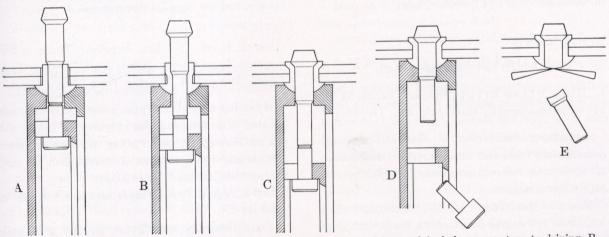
A—Self-Plugging Cherry Blind Rivet is placed in gun and inserted in hole preparatory to driving. B—Pull from gun is drawing enlarged portion of stem into shank of rivet, expanding it to fill the hole. C—Continued Pull has expanded all of rivet shank, conical tip of stem has upset rivet tail to form head. D—Gun exerts increased pull to break stem at notch. Gun end of stem now falls out; other end remains in rivet. E—The job is finished by cutting off the projecting stem flush with the head of the rivet as shown here.
